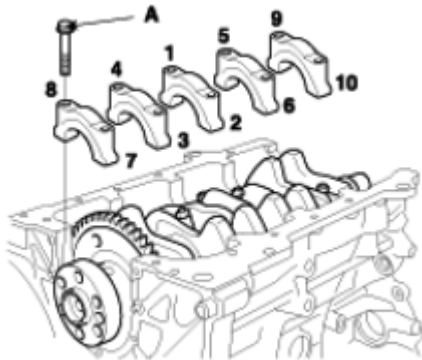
Identifying Bearing Cap Bolts Tightening Sequence
